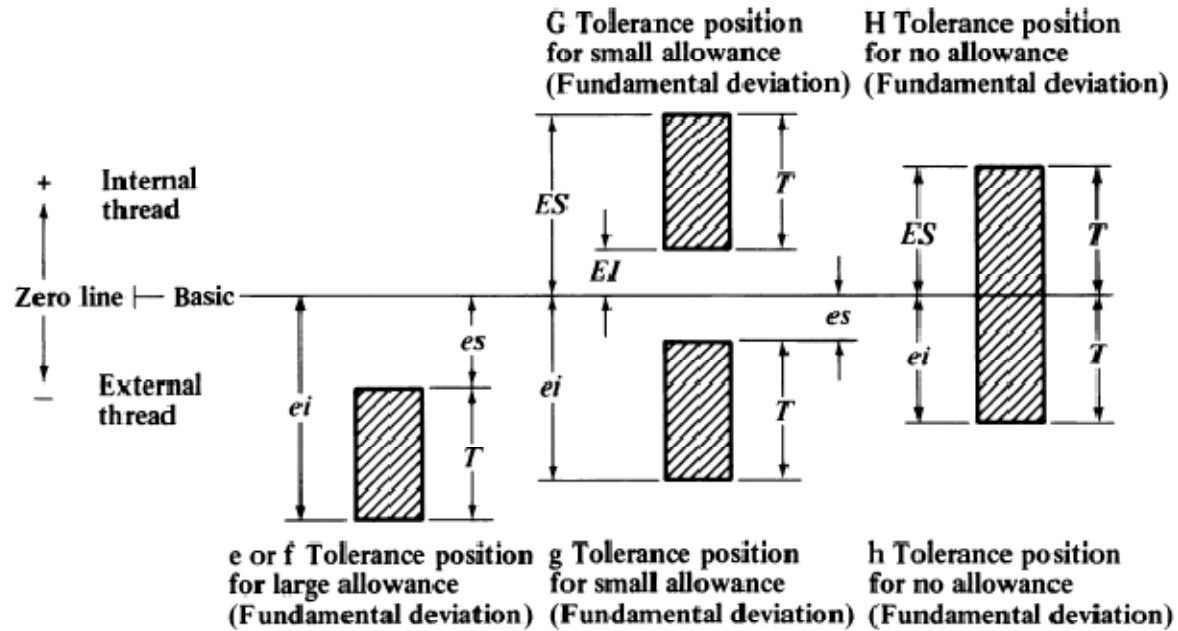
Metric Tolerance System for Screw Threads
